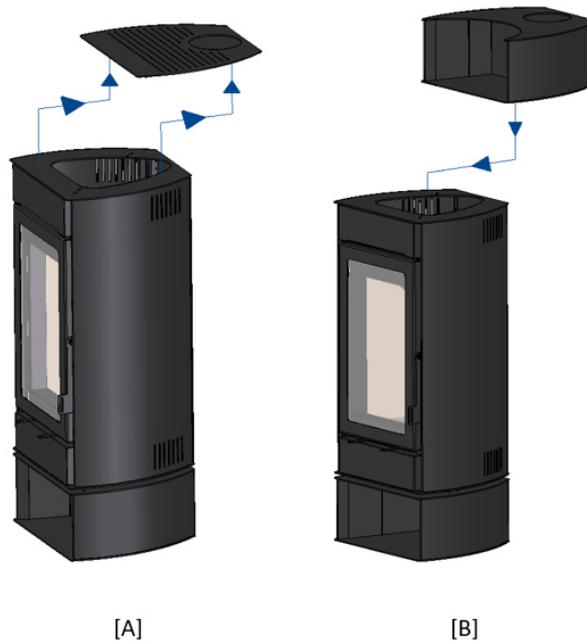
[A] Remove stove top; [B] Installation of optional module
